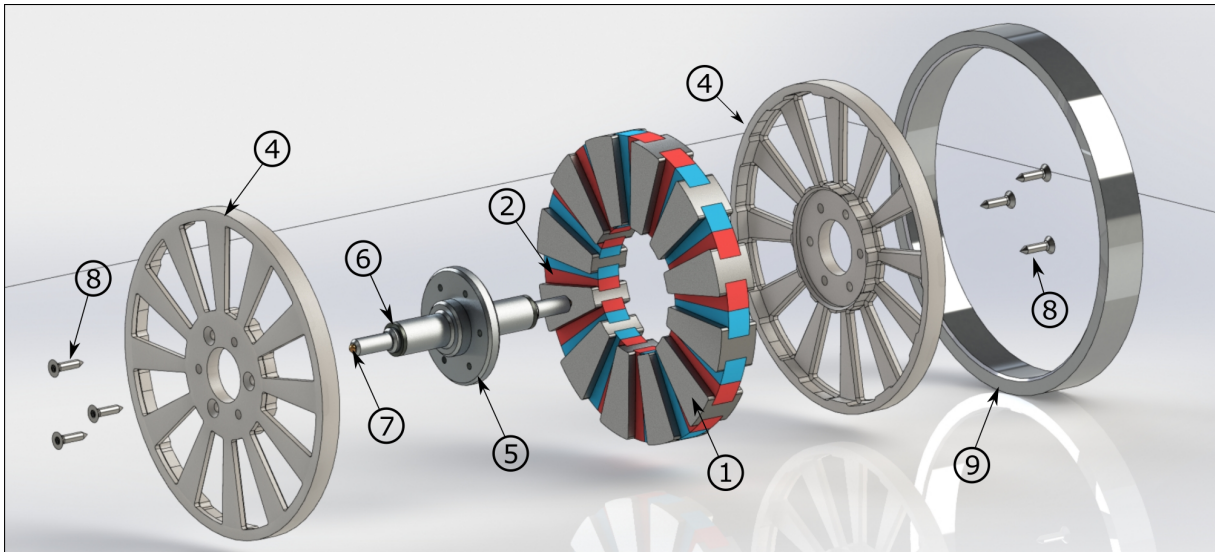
Exploded view of the design of a rotor with six pairs of poles.
